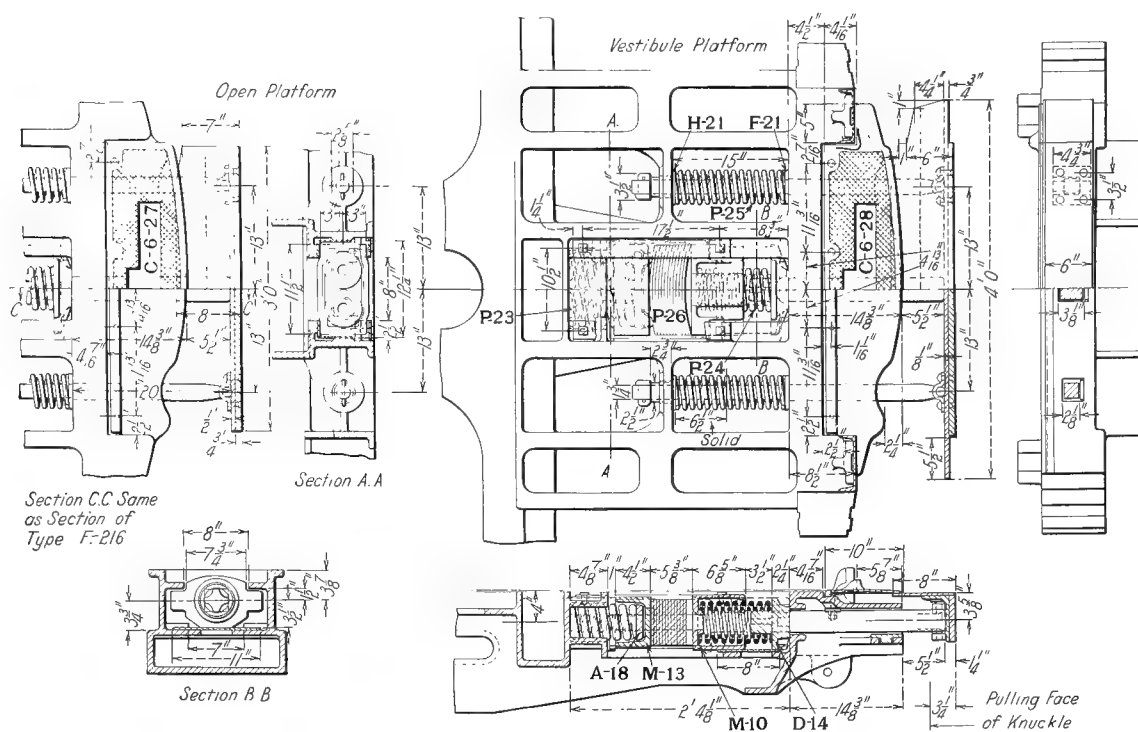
Application of Standard Steel Buffers to Cast Steel Platforms. Standard Coupler Company
